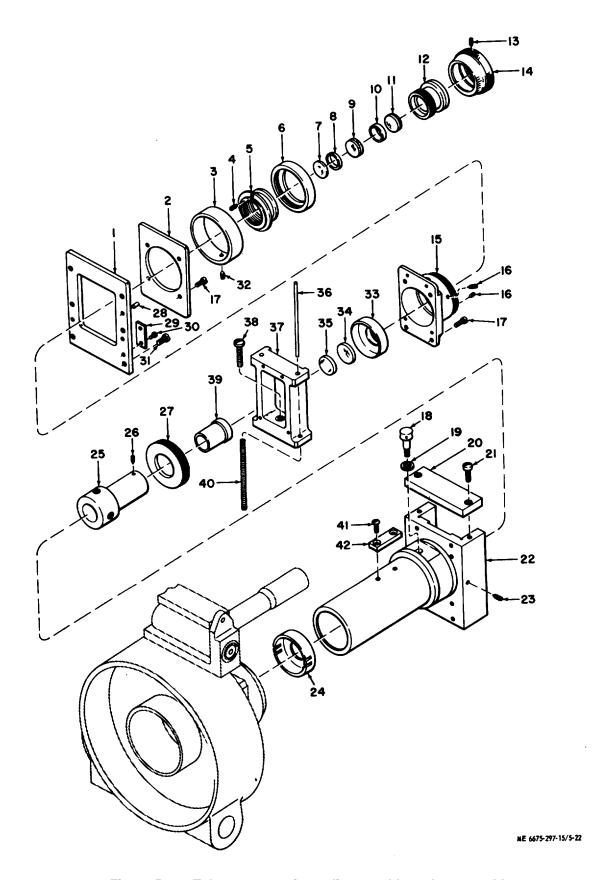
Telescope eyepiece, disassembly and reassembly.
